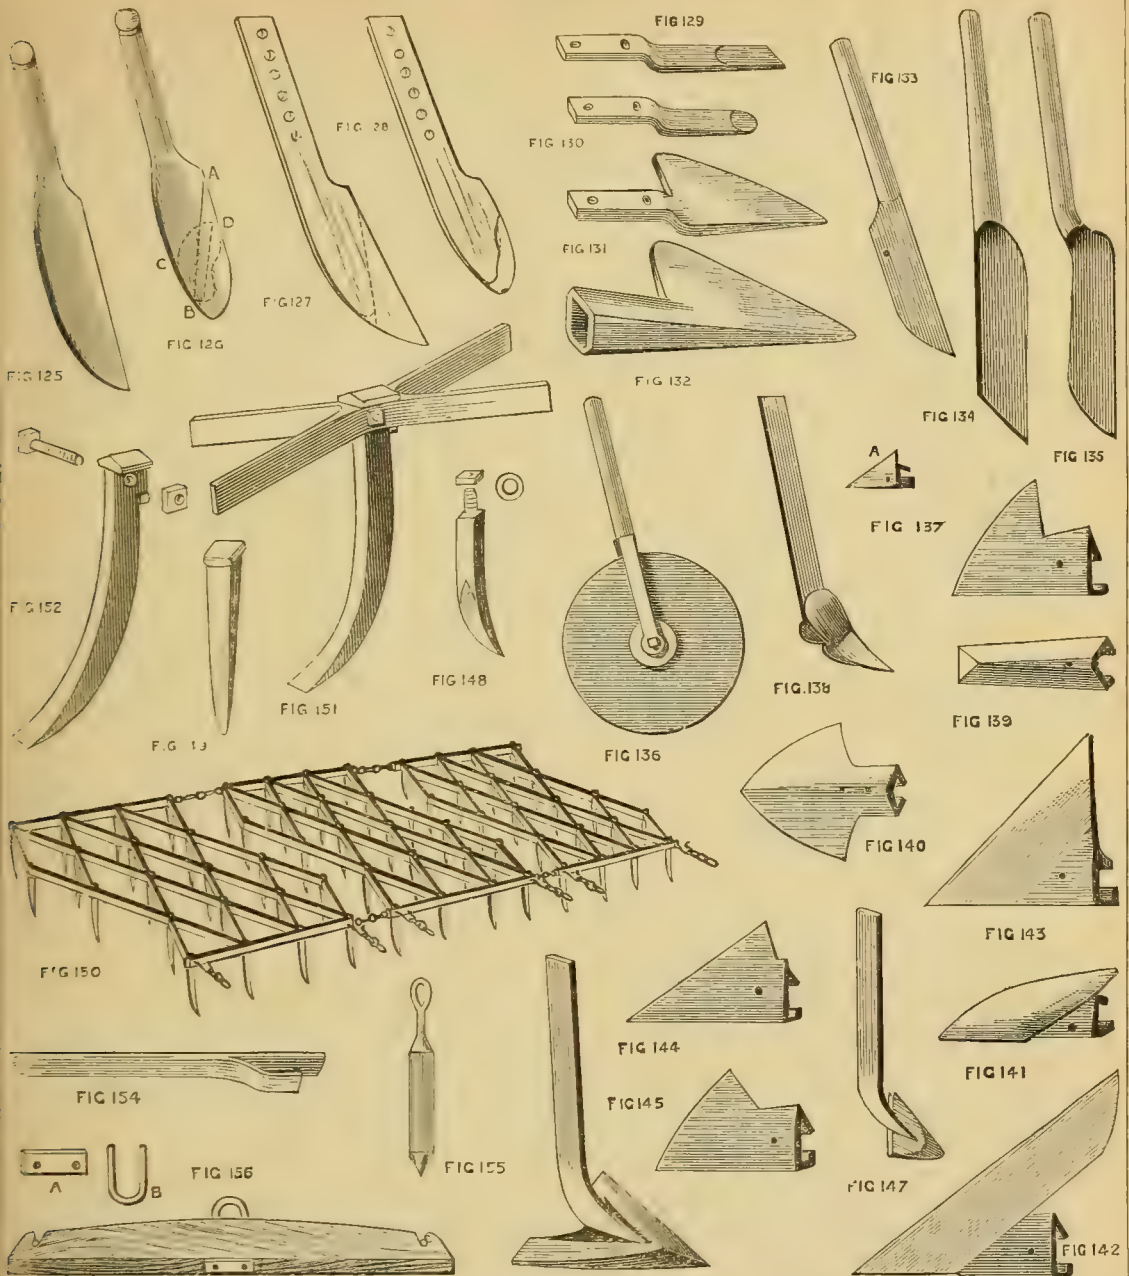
PLOWH COULTER. FIG. 126.—PLOWH COULTER OUT OF REPAIR. FIG. 127.—OLD STYLE COULTER. FIG. 128.—OLD COULTER WORN. FIG. 129.—OLD STYLE PLOWHSHARE. FIG. 130.—DITTO, NEEDING REPAIR. FIG. 131.—SKIM SHARE, OLD STYLE. FIG. 132.—SKIM WOODEN SHOE PLOWH. FIG. 133.—RANSOMES' KNIFE COULTER. FIG. 134.—HORNSBY'S KNIFE COULTER. FIG. 135.—HORNSBY'S HIGH-CUT COULTER. FIG. 136.—RANSOMES' DISC COULTER. FIG. 137.—CAST-IRON PLOWHSHARE. FIG. 138.—SKIM COULTER AND SHARE. FIG. 139.—SUBSOILING SHARE. FIG. 140.—RIDGING SHARE. FIG. 141.—SETTING-OUT SHARE. FIG. 142.—PARING SHARE. FIGS. 143, 144, 145.—CHILLED IRON SHARES. FIG. 146.—TINE OF CULTIVATOR, OLD STYLE. FIG. 147.—TINE OF TORMENTOR, OLD STYLE. FIG. 148.—TINE OF IRON HARROW, OLD STYLE. FIG. 149.—TINE OF WOODEN HARROW, OLD STYLE. FIG. 150.—ZIG-ZAG HARROWS, LINKED. FIGS. 151, 152.—KELL, MEATS AND CO.'S IMPROVED HARROW TINES, AND METHOD OF SECURING THEM. FIG. 153.—FORK OF HARROW STRETCHER. FIG. 155.—TAIL WEIGHT OF CHAIN HARROW, OLD WHIPPLE TREE, STAPLE, AND GUARD.
